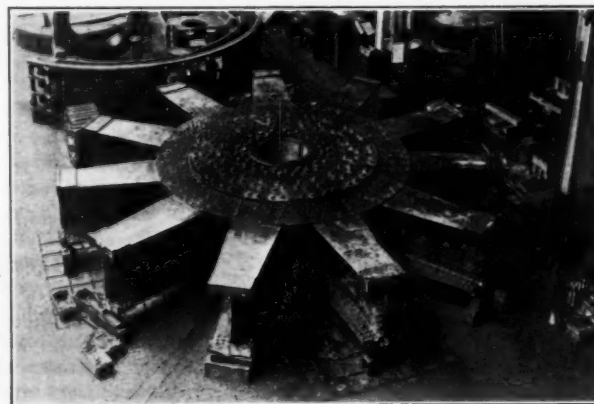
ASSEMBLY OF ROTOR SPIDER HUB AND ARMS
